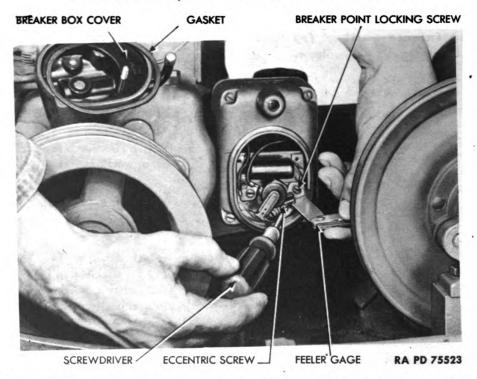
Adjusting Steam Generating Plant Engine Magneto Points
